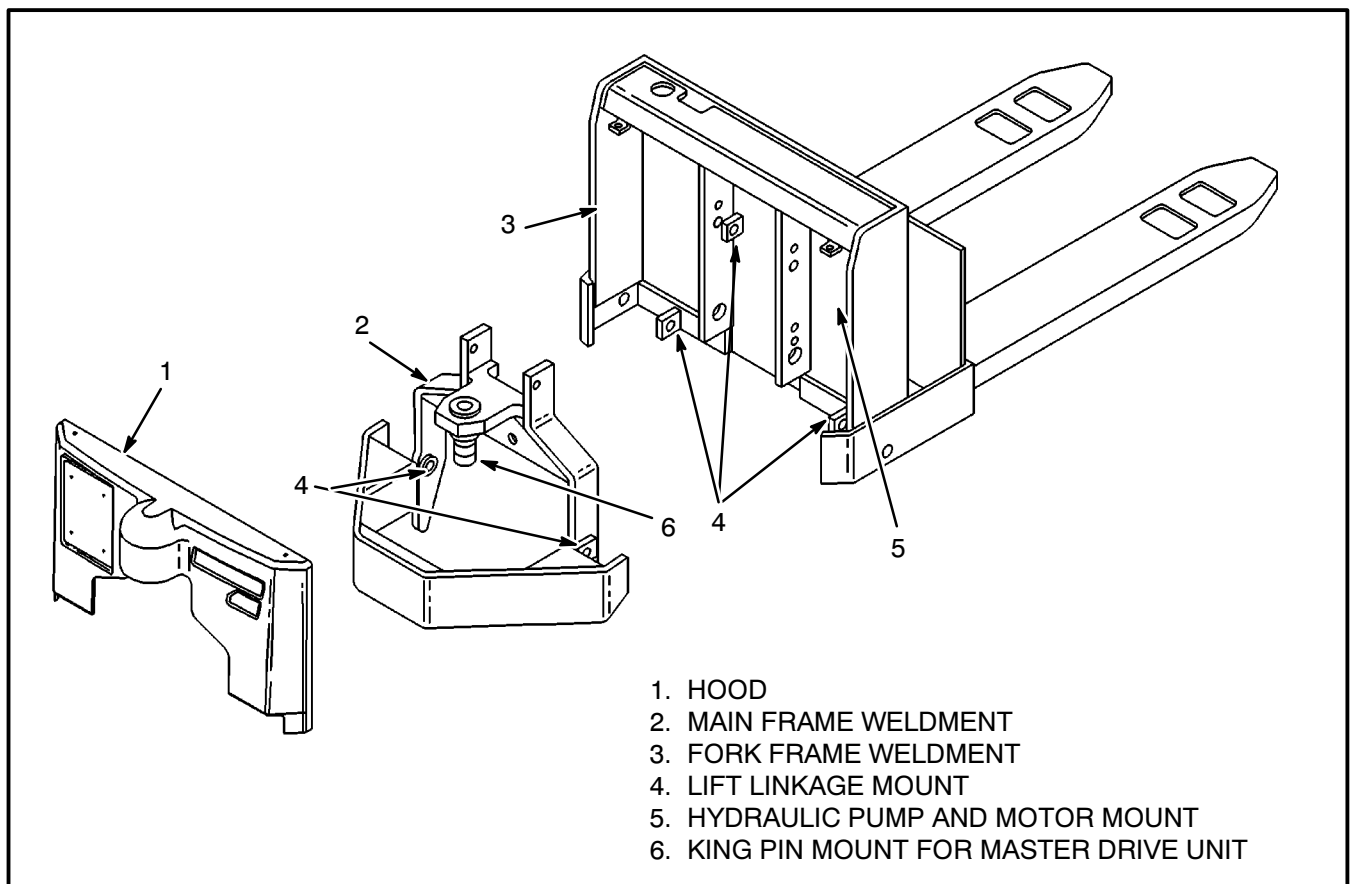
FRAME WELDMENT – W40XT, W45XT
